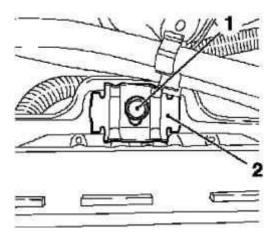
Mounting the battery: 1 - pin 2 - spud
